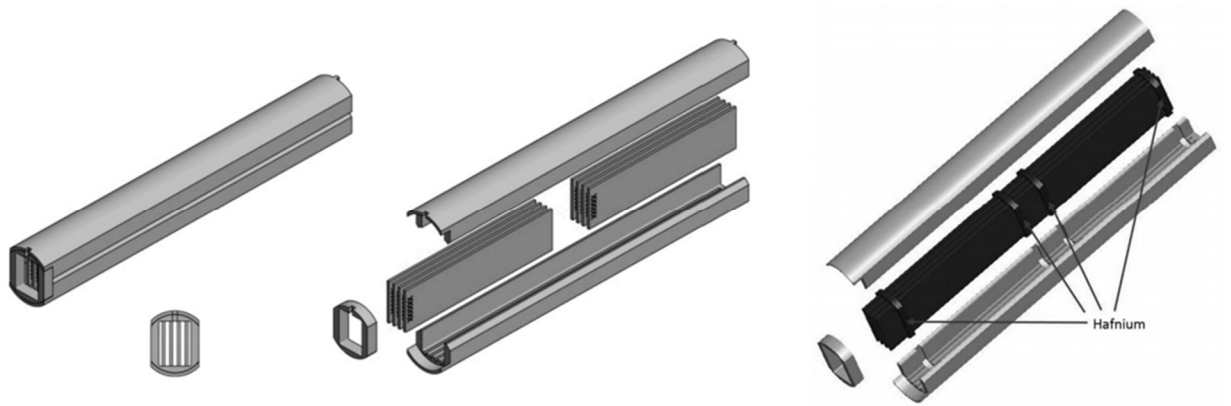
MP-1 capsule assembly (hafnium filter shown in purple)
